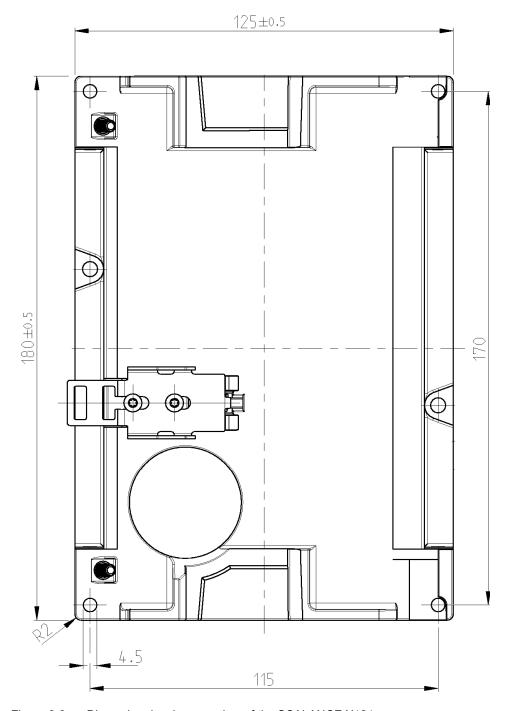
Dimension drawing rear view of the SCALANCE X124
